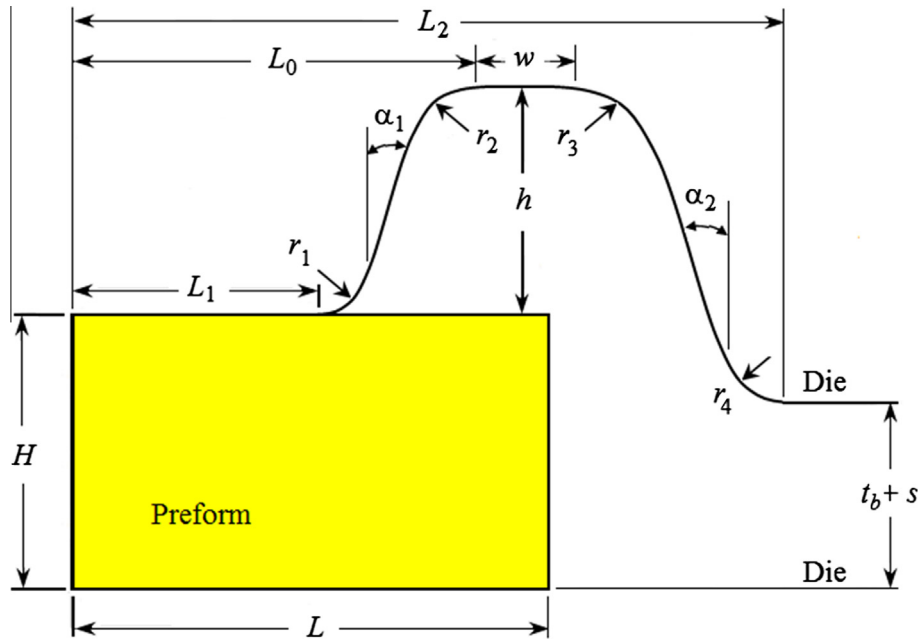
Cross-sectional dimensions of a quarter of the I-beam processed by forging.
